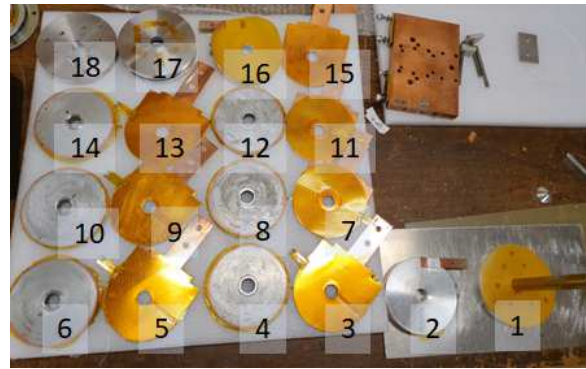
Assembly parts for the magnet. The numbered parts are for the coil assembly. The upper right side rectangular copper block without a part number is a coldhead connection adaptor.
